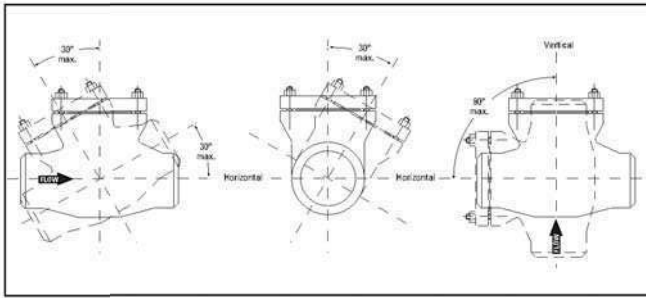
E Angle of incline and roll angle for piston check, stop check, ball, and swing check valves.
